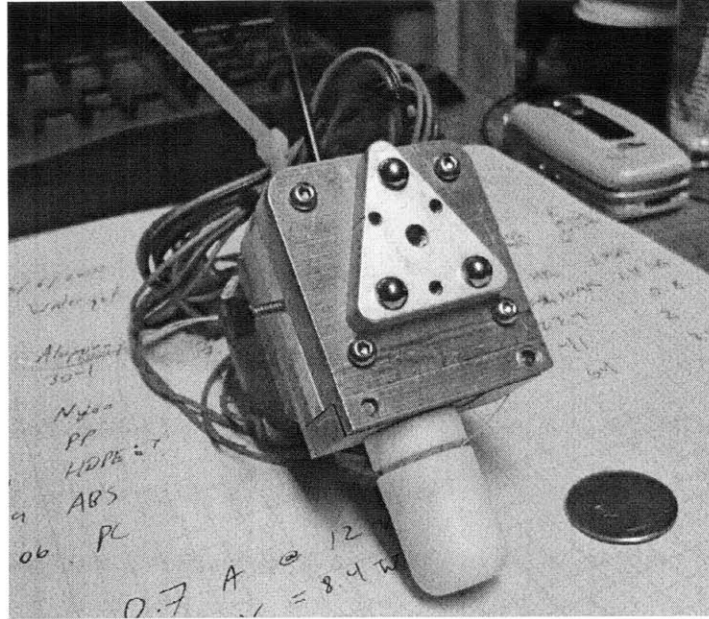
Completed extruder assembly, with kinematic coupling.
